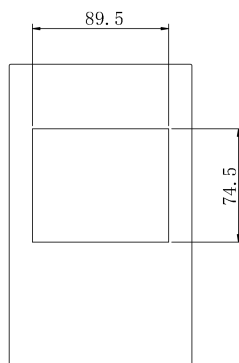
Mounting hole dimensions for operating panel fixed base (unit: mm)
